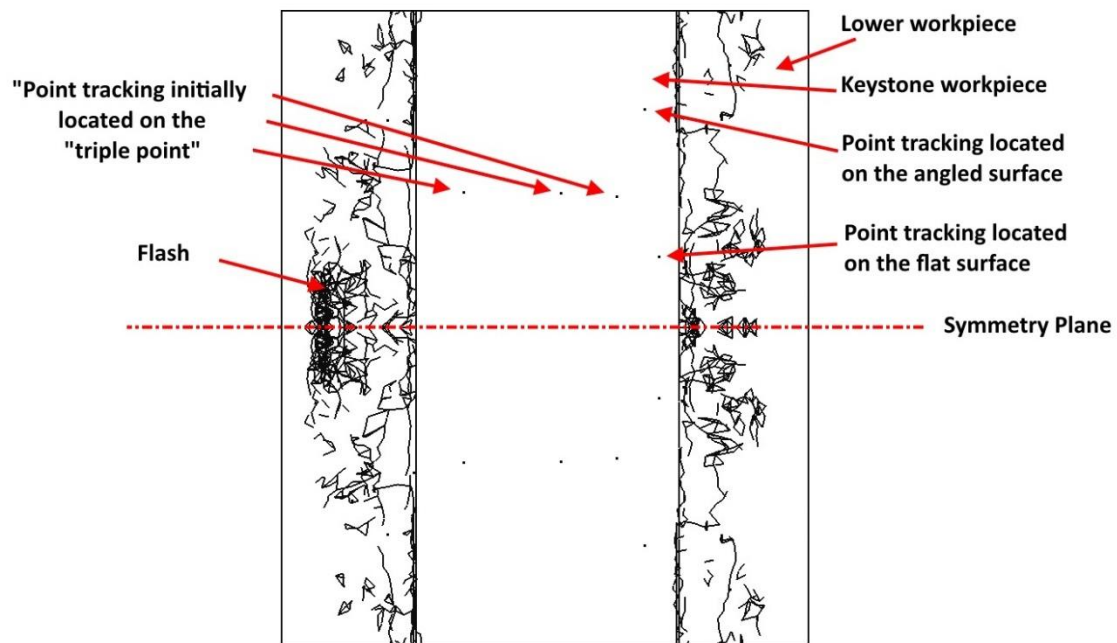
Plan view of Figure 6.11(d) showing the point tracking location within the keystone weld (2.37 mm of burn-off).
